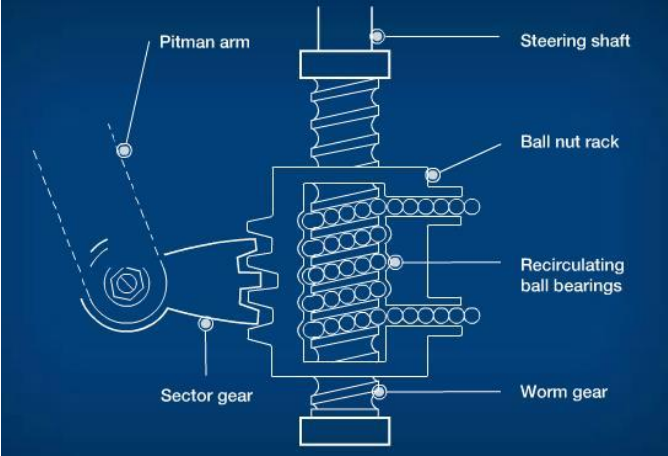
Recirculating Ball/Steering Box Steering Mechanism
